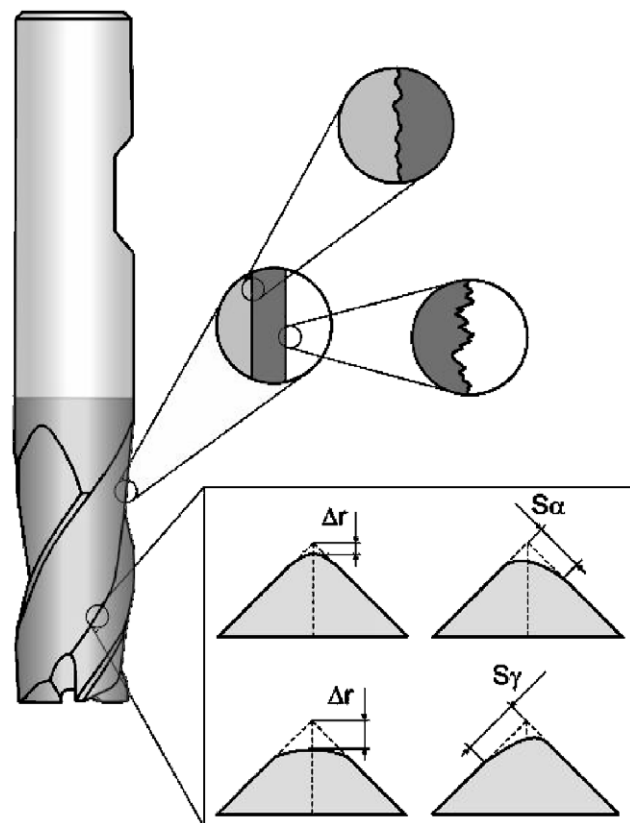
Drawing of the end mill tool showing the texture features for the substrate and the coating as well as the different configurations of optimized cutting edges. Drawing of an end mill: Δr is the nose radius of the tool, S_α and S_γ correspond to the distances of curvature at the flank and rake surfaces of the end mill cutter, respectively.
